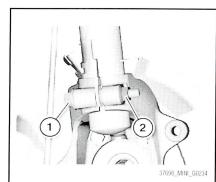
Slacken nut (2). Pull out screw (1) towards rear and remove swivel bearing
